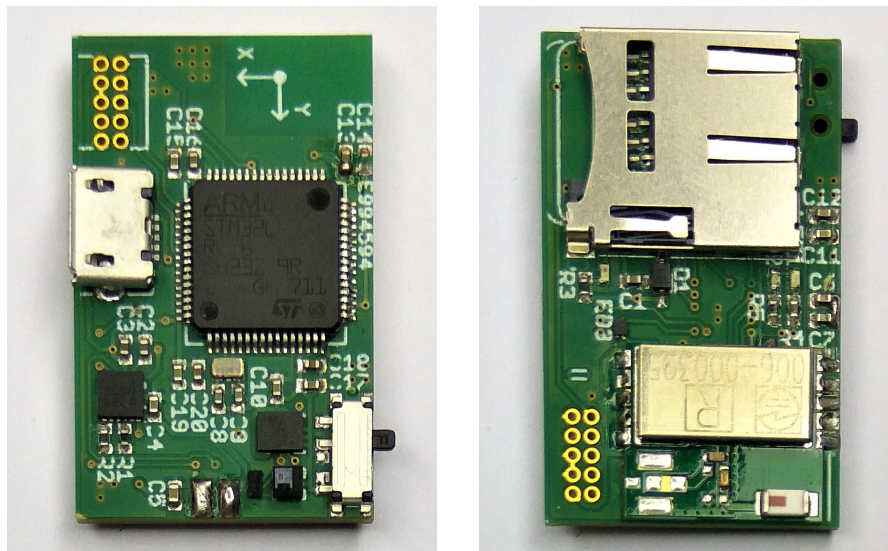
Top and bottom view of the assembled Winter platform.
